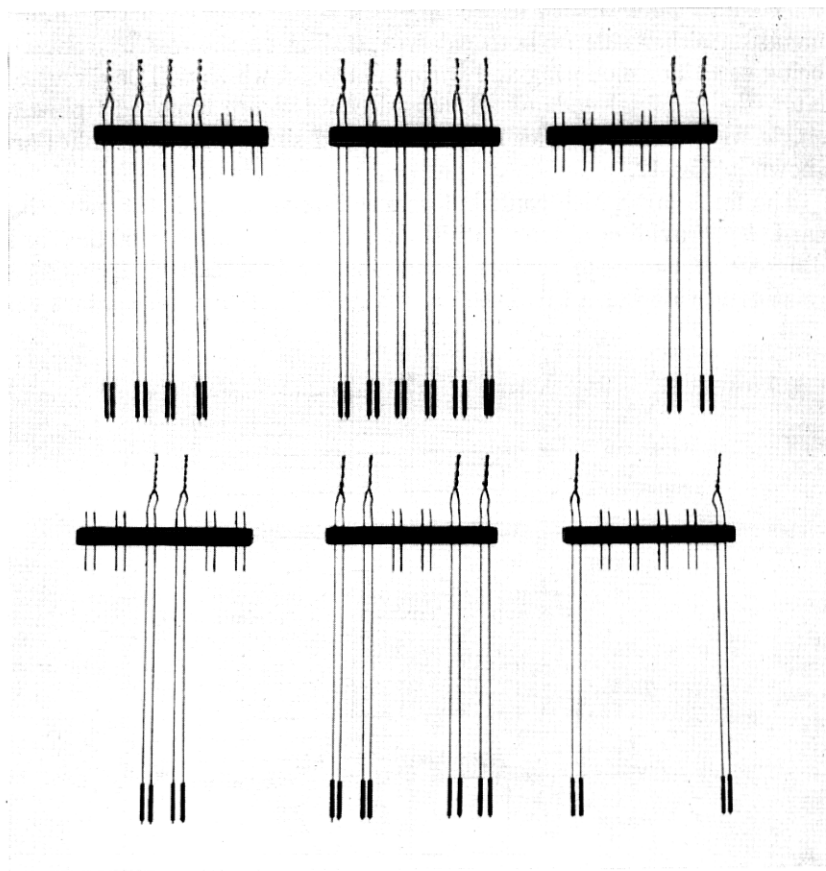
BF relay typical coded movable twin wire assemblies.
